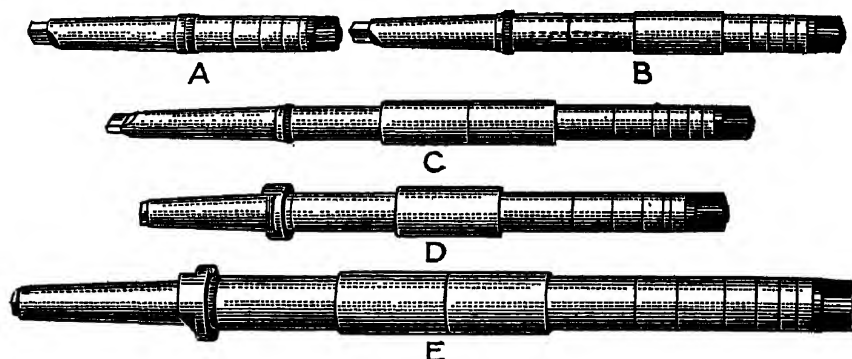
CUTTER ARBORS FOR USE IN BROWN & SHARPE MILLING MACHINE, WITH THREADED-NOSE SPINDLES
